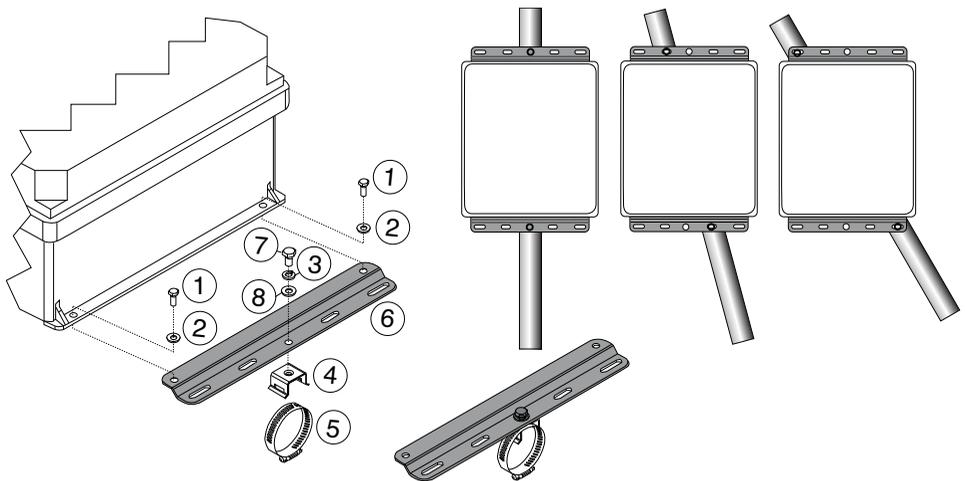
Attach mounting plates to Analyzer Interface Unit, attach band clamp mounting brackets to mounting plates, and secure to mounting post using band clamps.
